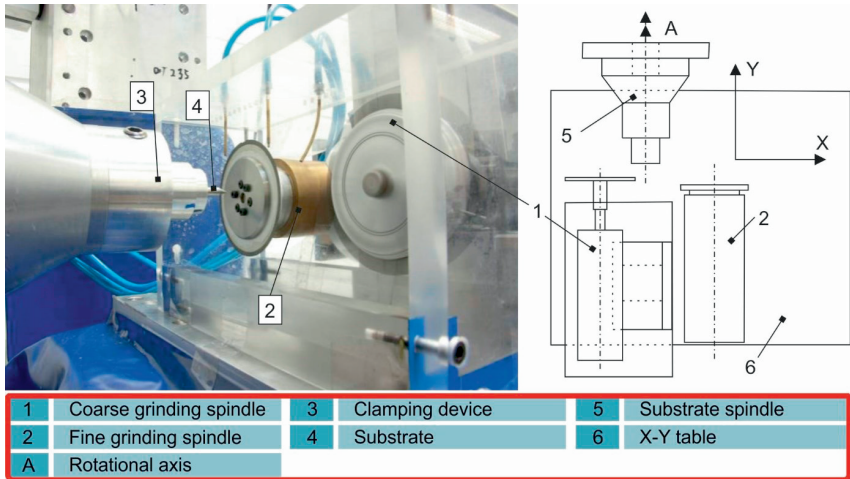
Cylindrical tool grinding unit by SCHMIDT [Auri12]
